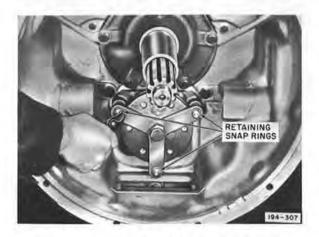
Installing Clutch Brake Pressure Plate Retaining Snap Rings
